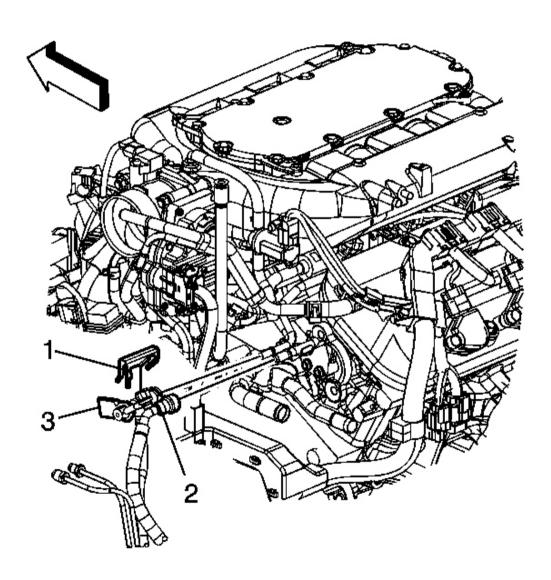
View Of Fuel Feed Line Courtesy of GENERAL MOTORS CORP.
